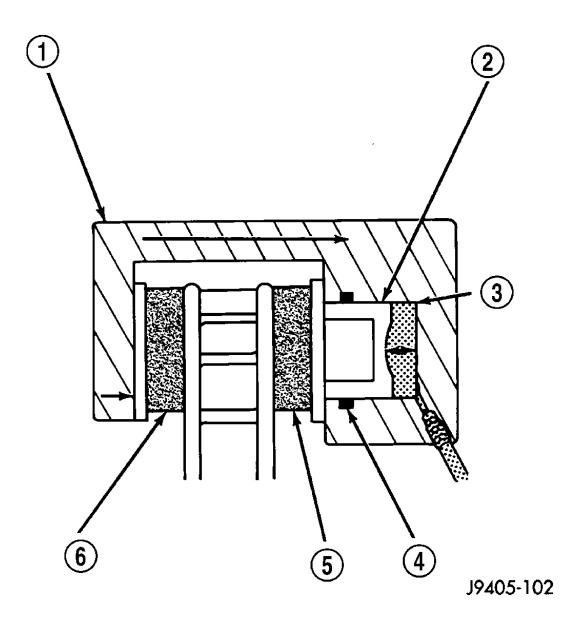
Brake Caliper Operation Courtesy of CHRYSLER LLC
